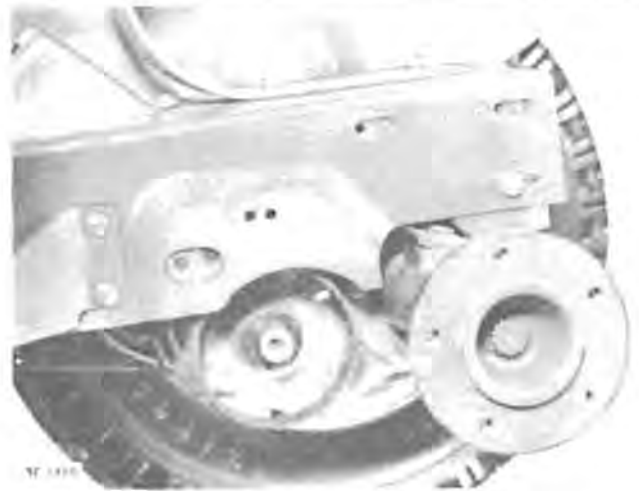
Brake Bracket Used on Later 110 and All 112 Tractors
